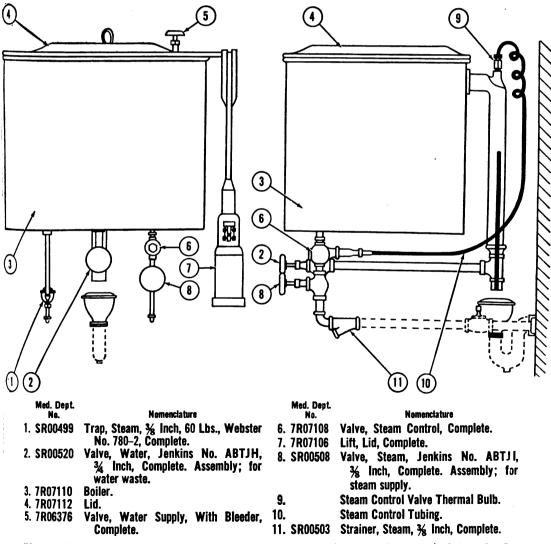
Utensil sterilizer, item No. 7910305, manufactured by Hospital Supply Co.
